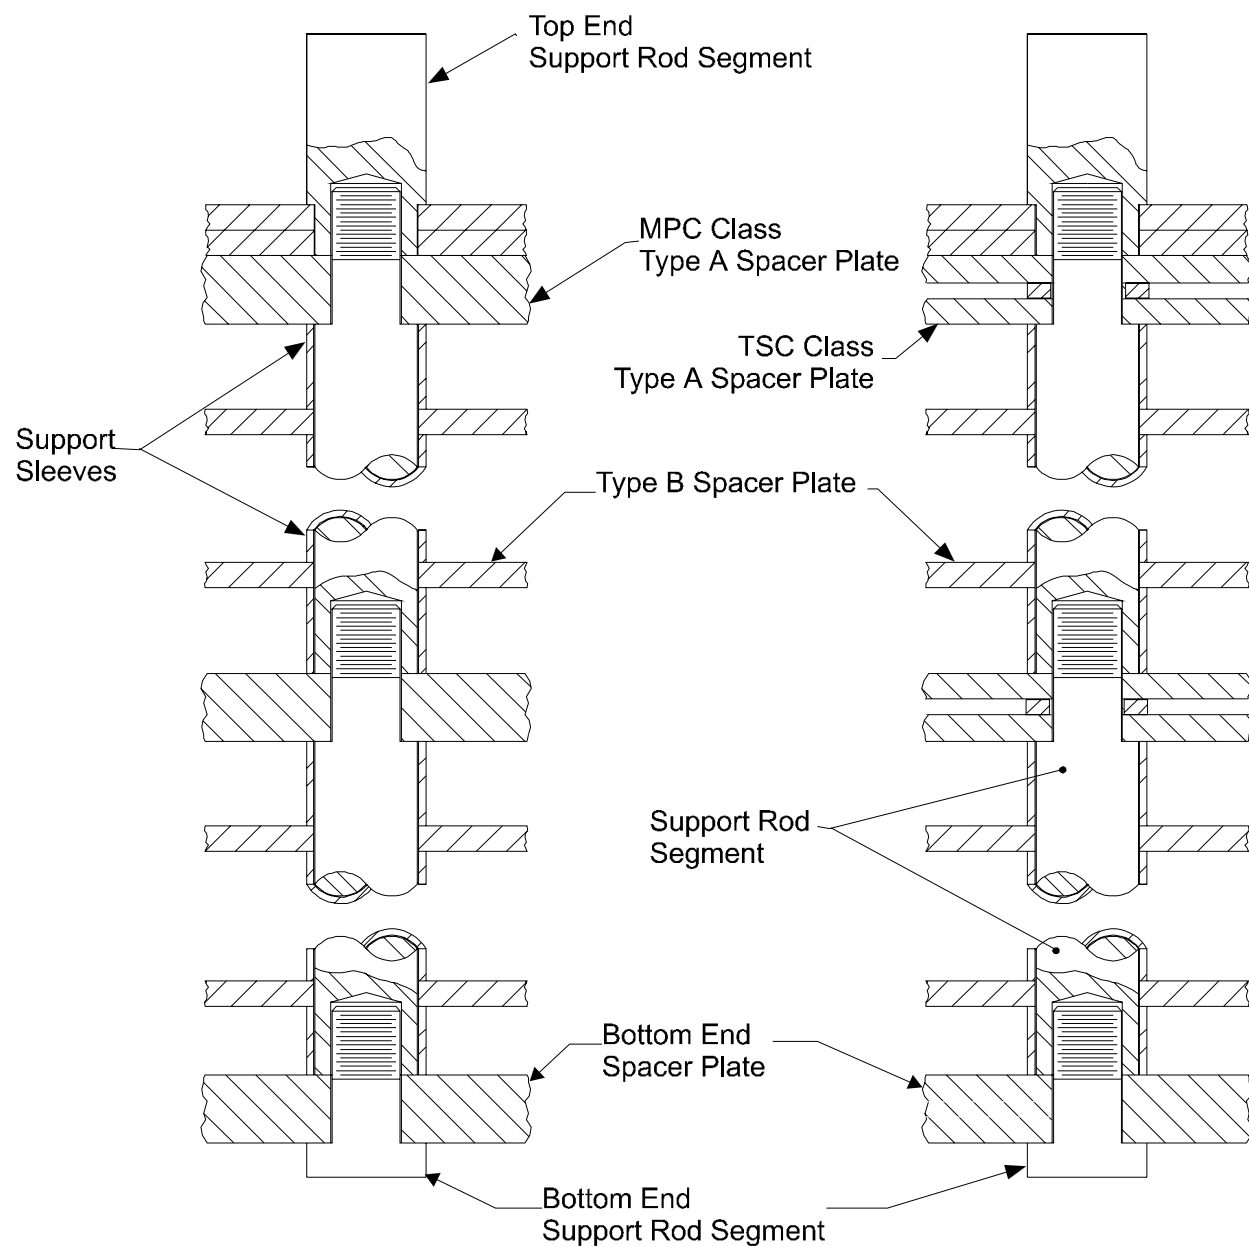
FuelSolutions™ W21 Support Rod Assembly Detail
